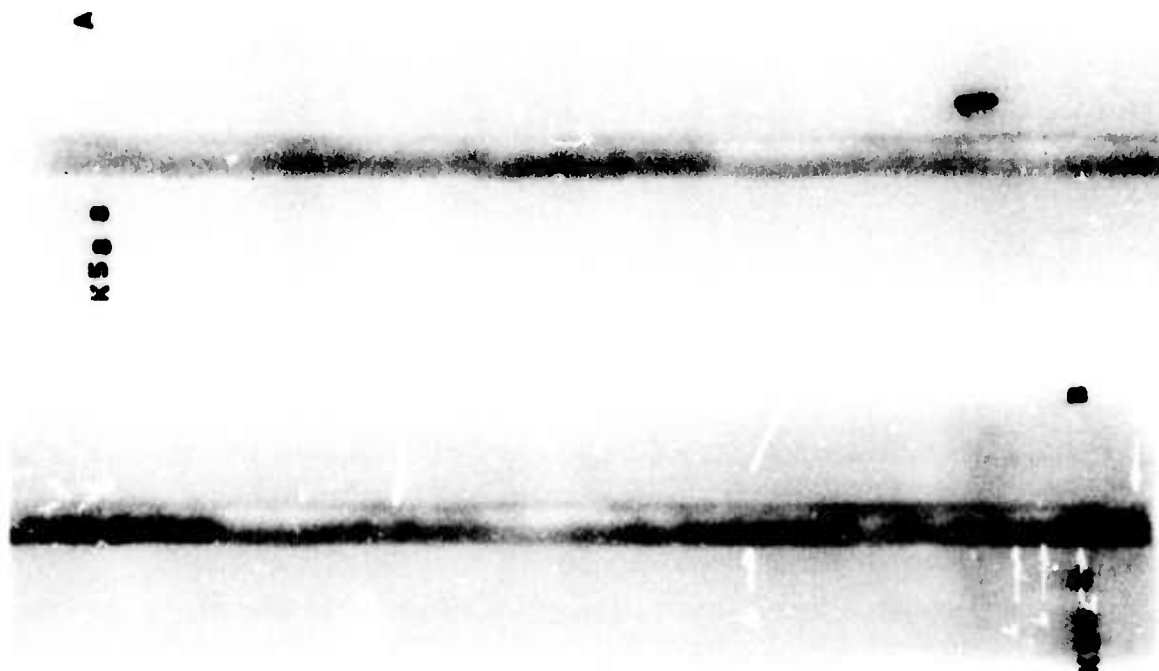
26 —Photographs of GTA weld radiographs
